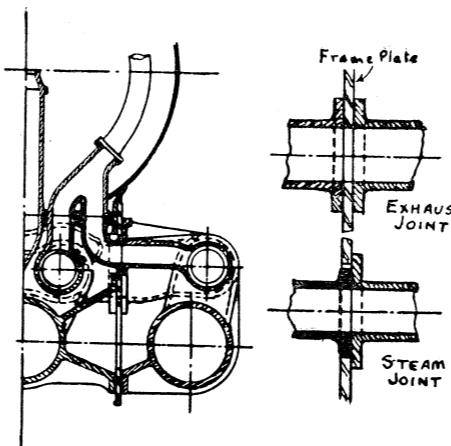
Cross Section of Cylinders, Cal. Rly. and Details of Joints.
